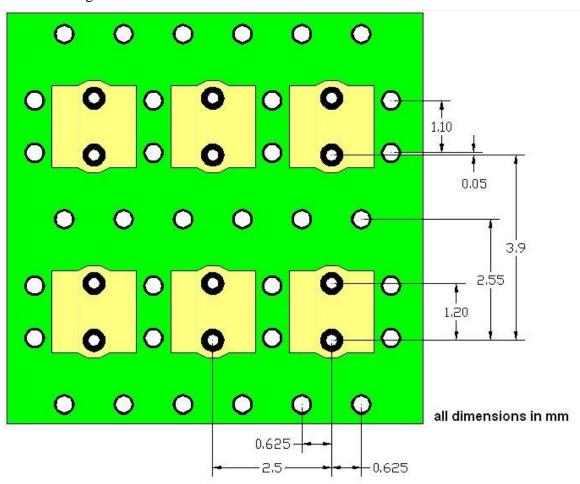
STRADA Whisper PiR 85-Ohm Connector Daughtercard Footprint Dimensions
